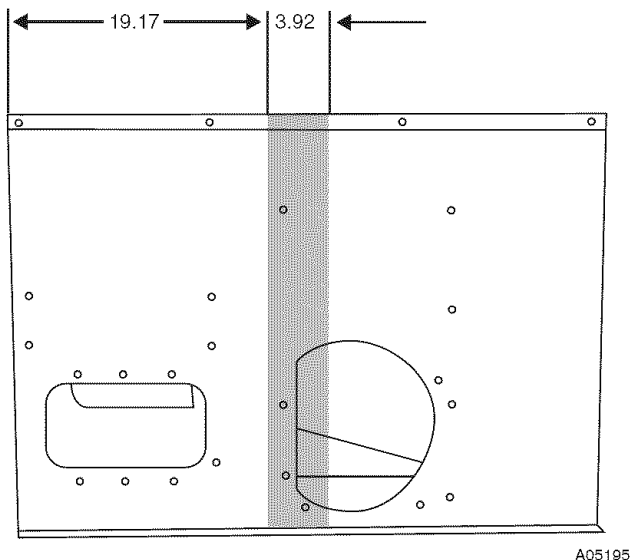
Area Not to be Drilled More Than 3/4-in.
